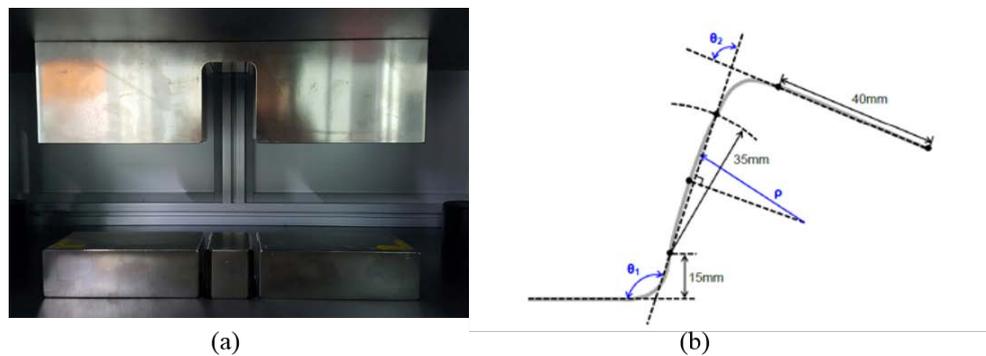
(a) U-draw stamping apparatus, (b) springback measurement
